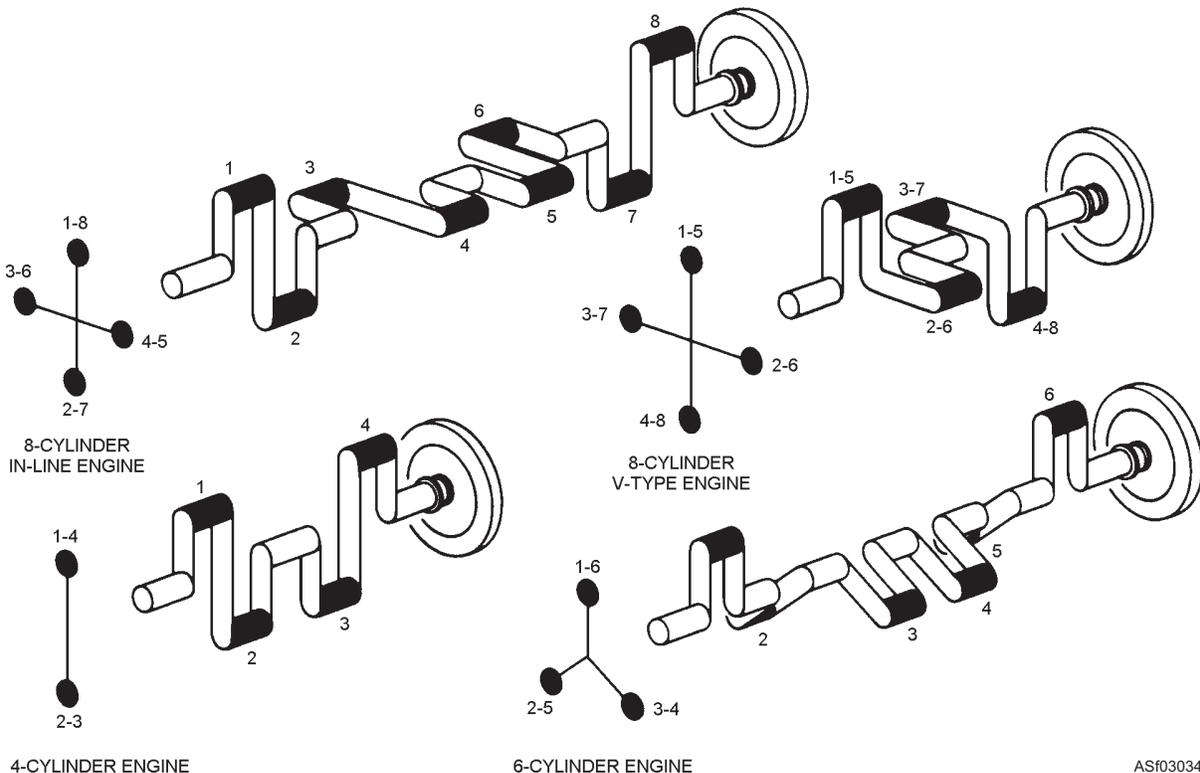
Crankshaft and throw arrangements commonly used.
